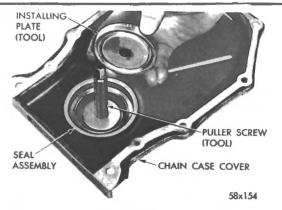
Positioning Installer Plate on New Seal Tool CA-3506
